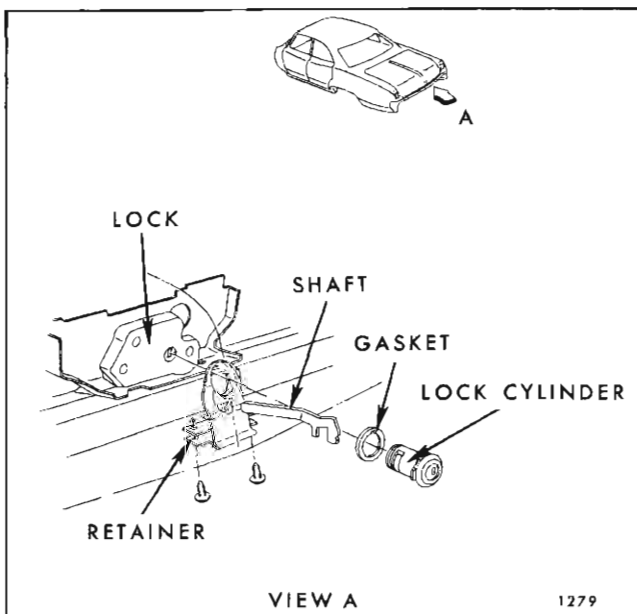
F10—Rear Compartment Lid Lock Cylinder Assembly
